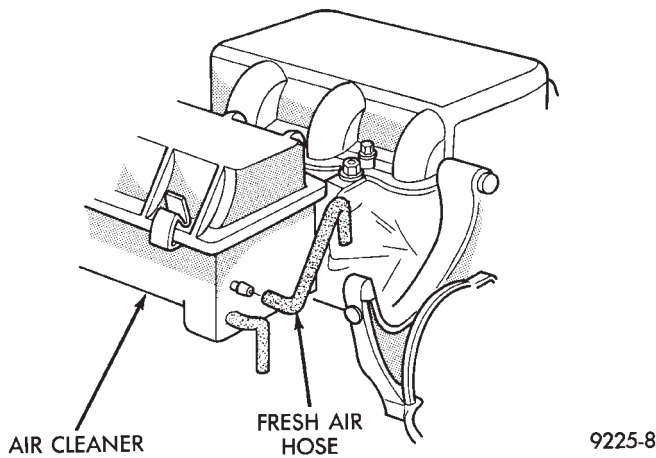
Fresh Air Hose—3.0L Engine PCV System
